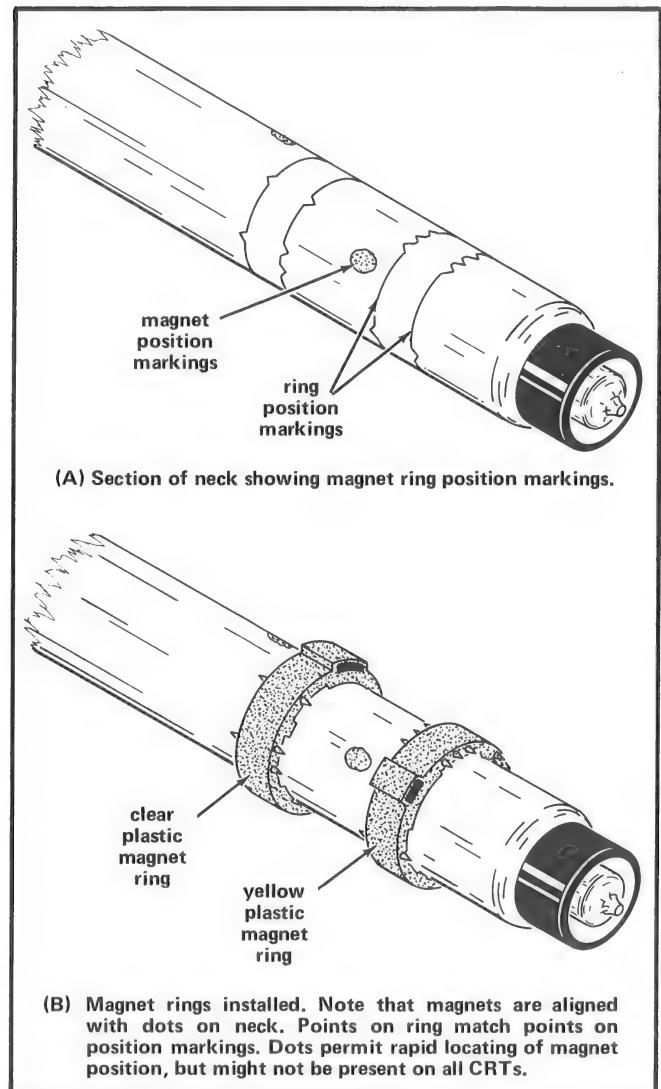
CRT Magnet ring location details. The magnet rings should be used only when supplied with the CRT.
